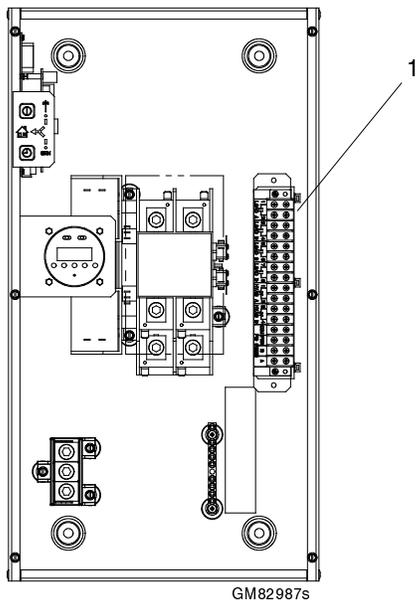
Recommended Kit Mounting Locations, 400 Amp Model RXT Transfer Switches without Mounting Holes or Hardware
